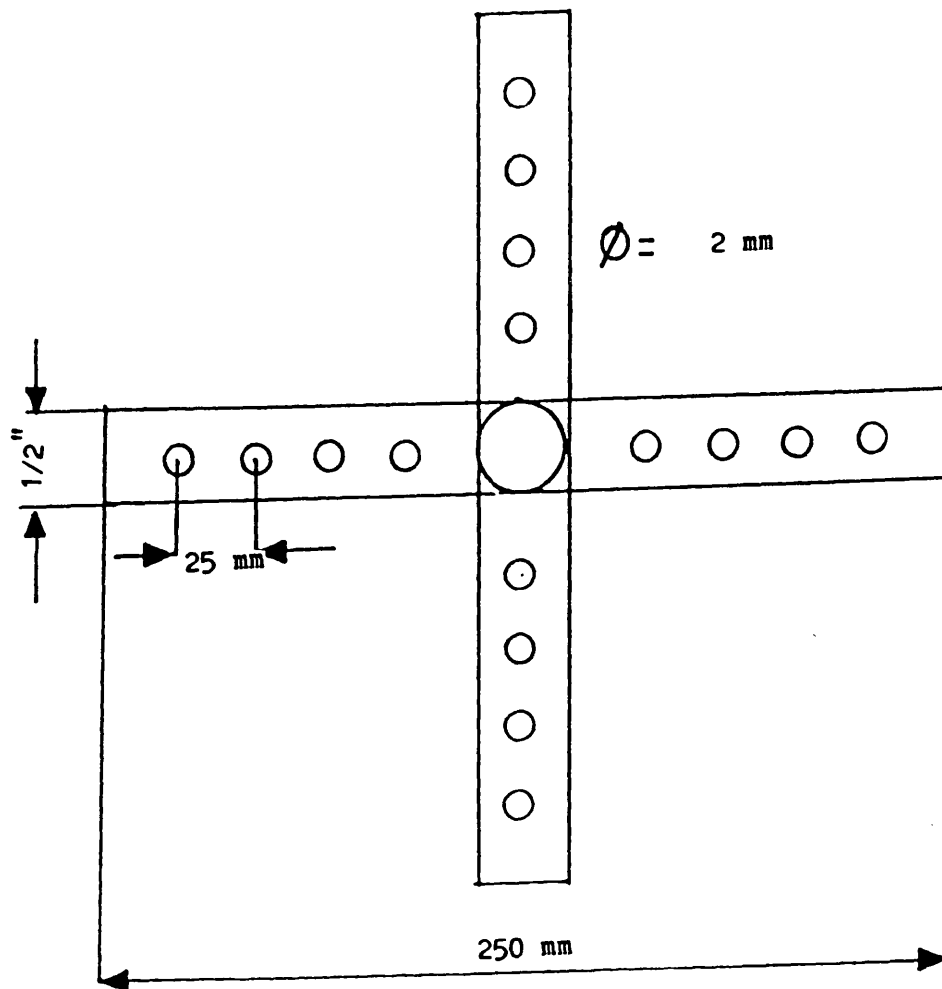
(a) - Schematic top view of the liquid distributor.
